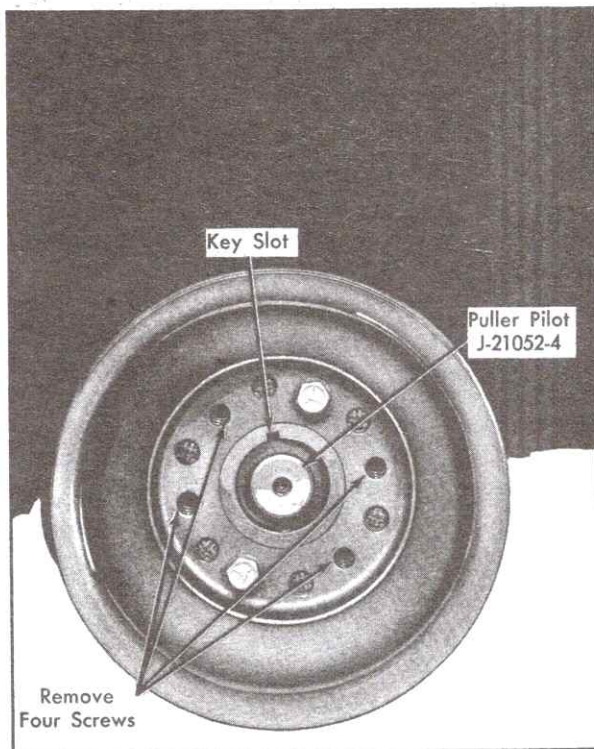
Installing Harmonic Balancer Puller Pilot
